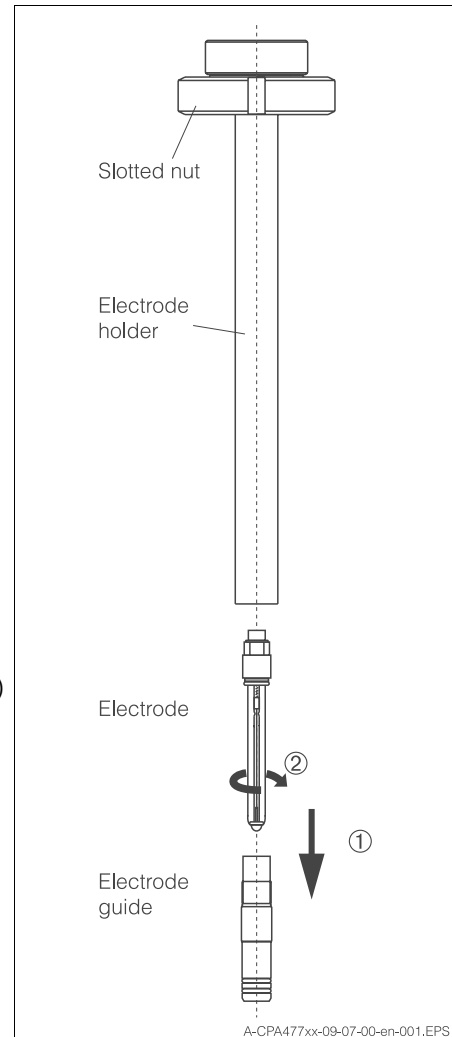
Installing a gel electrode in the CleanFit P CPA 477 assembly
